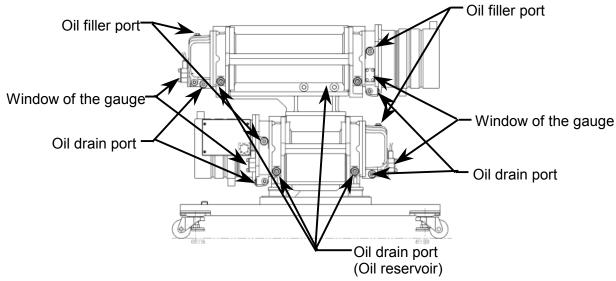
Oil filler port, Oil level gauge, and oil drain port positions
